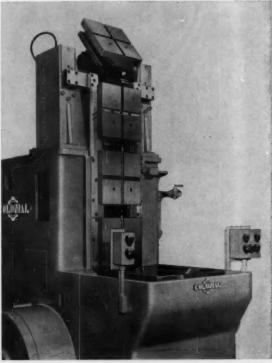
View of machine seen in Fig. 1 with guards removed to show chain-mounted rams
